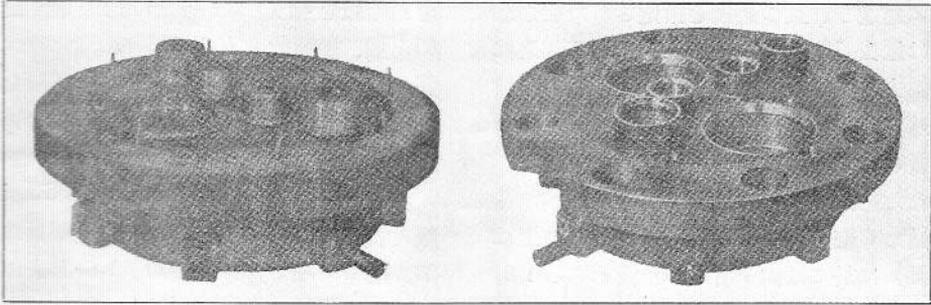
Cylinder Cover for a Four-stroke Trunk Piston Engine; On the Left: Ready for the Furnace; On the Right: Machined and Finished.
